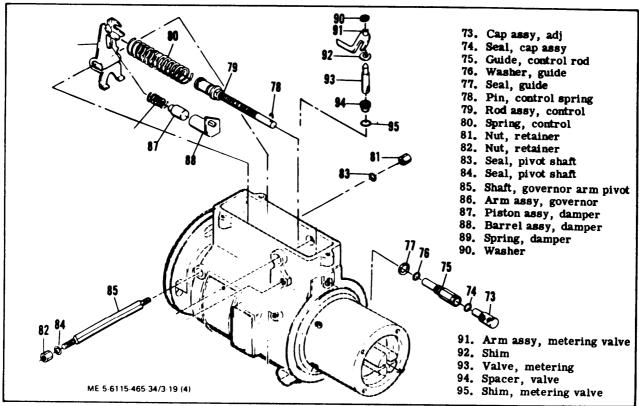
Fuel Injection Pump, Exploded View (Sheet 4 of 7)
